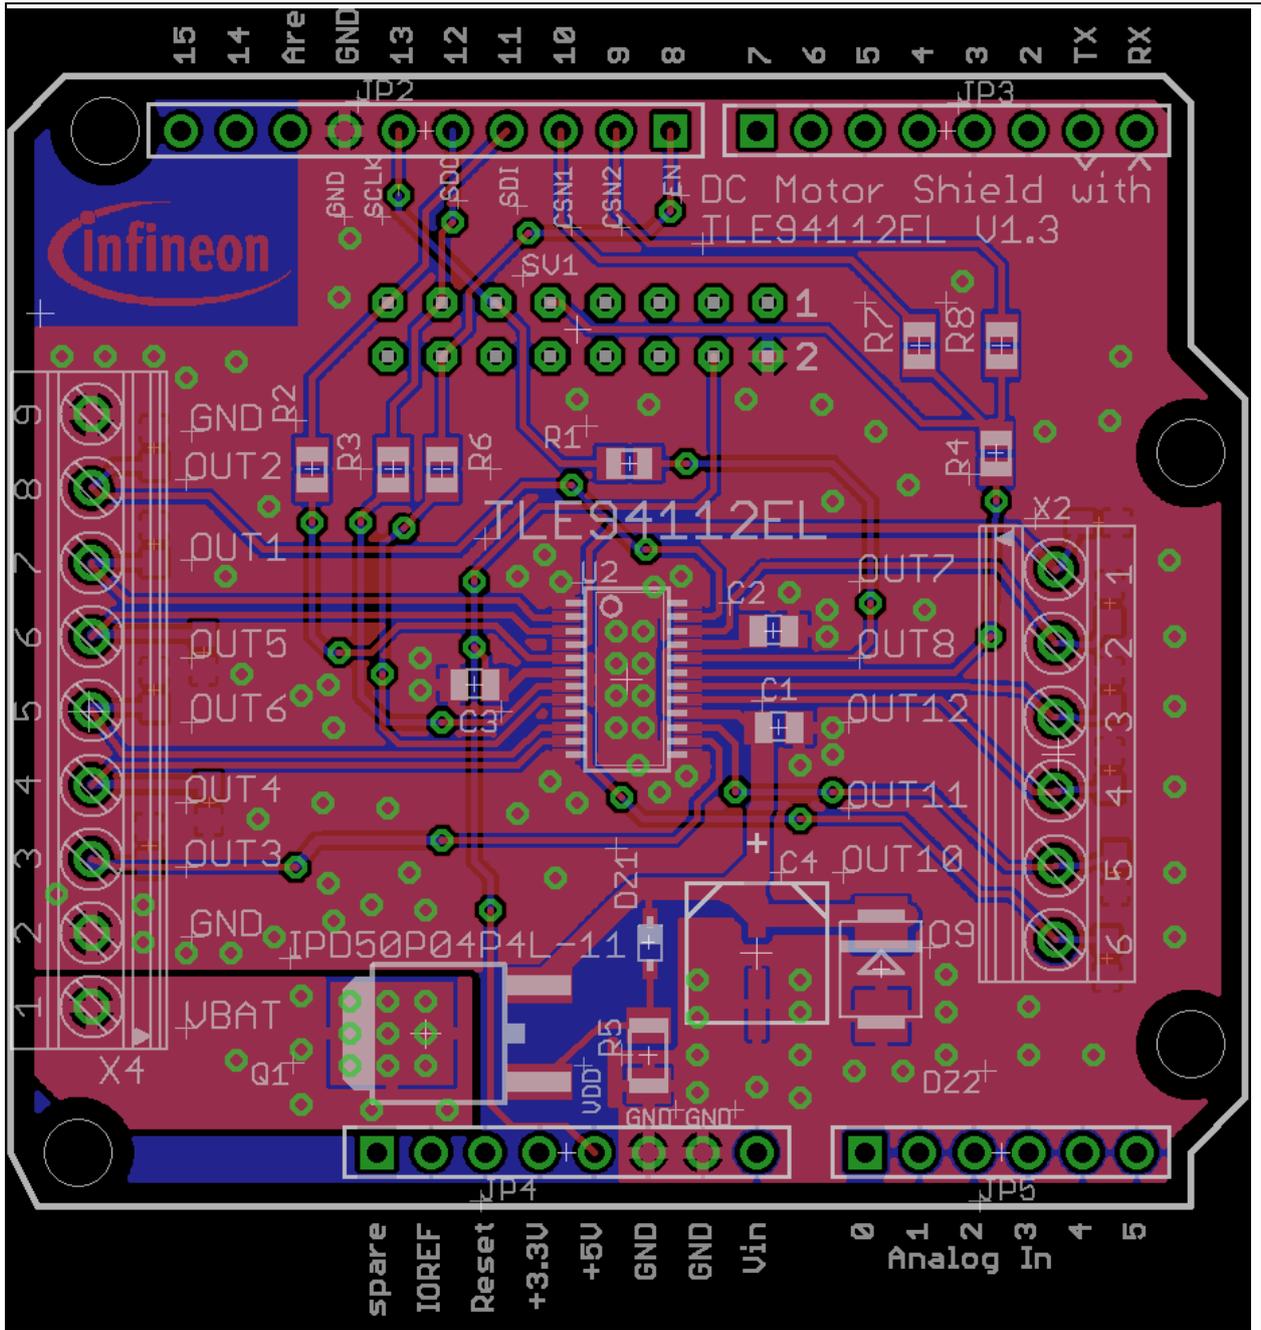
Figure 6 DC Motor Control Shield for Arduino with TLE94112EL - Layout
